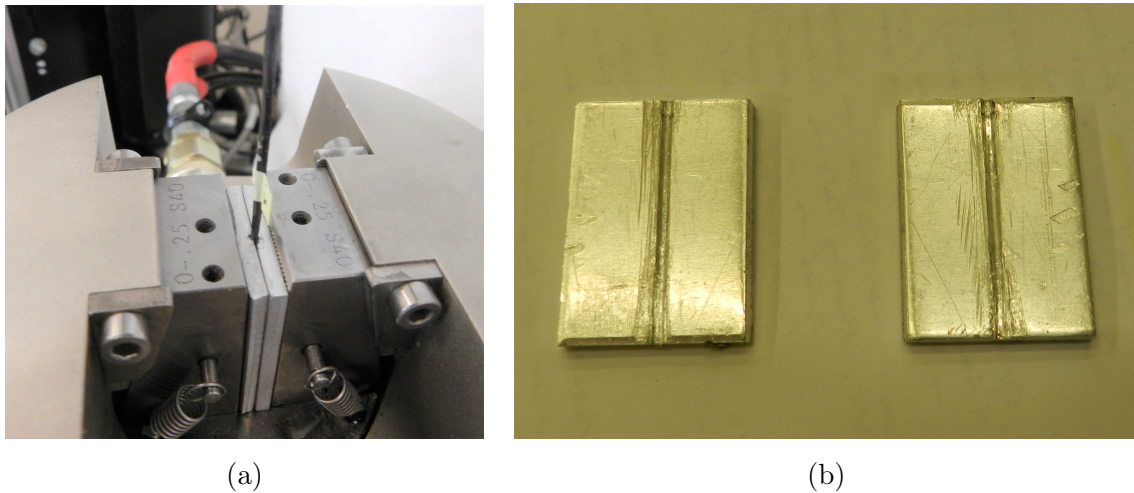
Aluminium plate end-tabbing method: a) plates in test machine; b) Plate surfaces.
